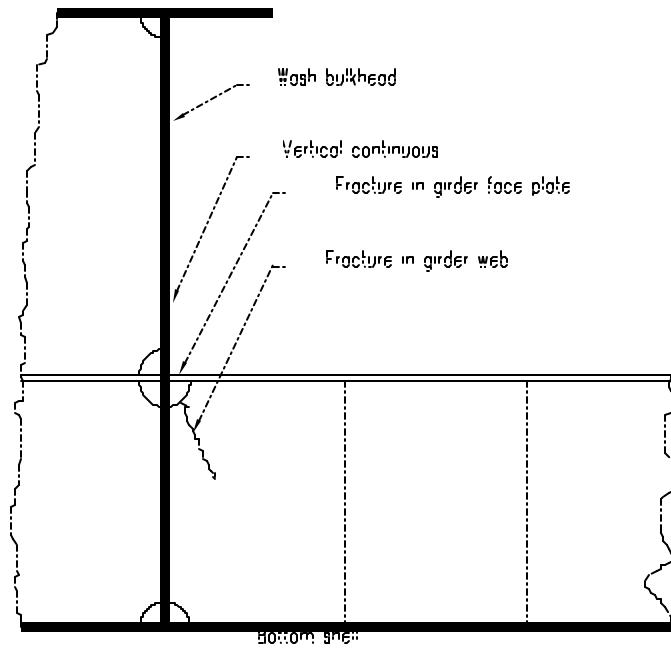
Buckled and fractured vertical web and bottom centreline girder bracket connection.
